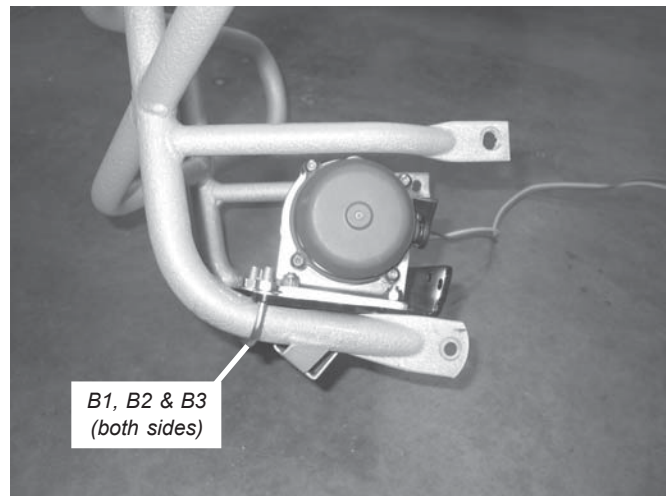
, Place Winch, Mounting Plate and Fairlead Assembly onto Front Bumper
